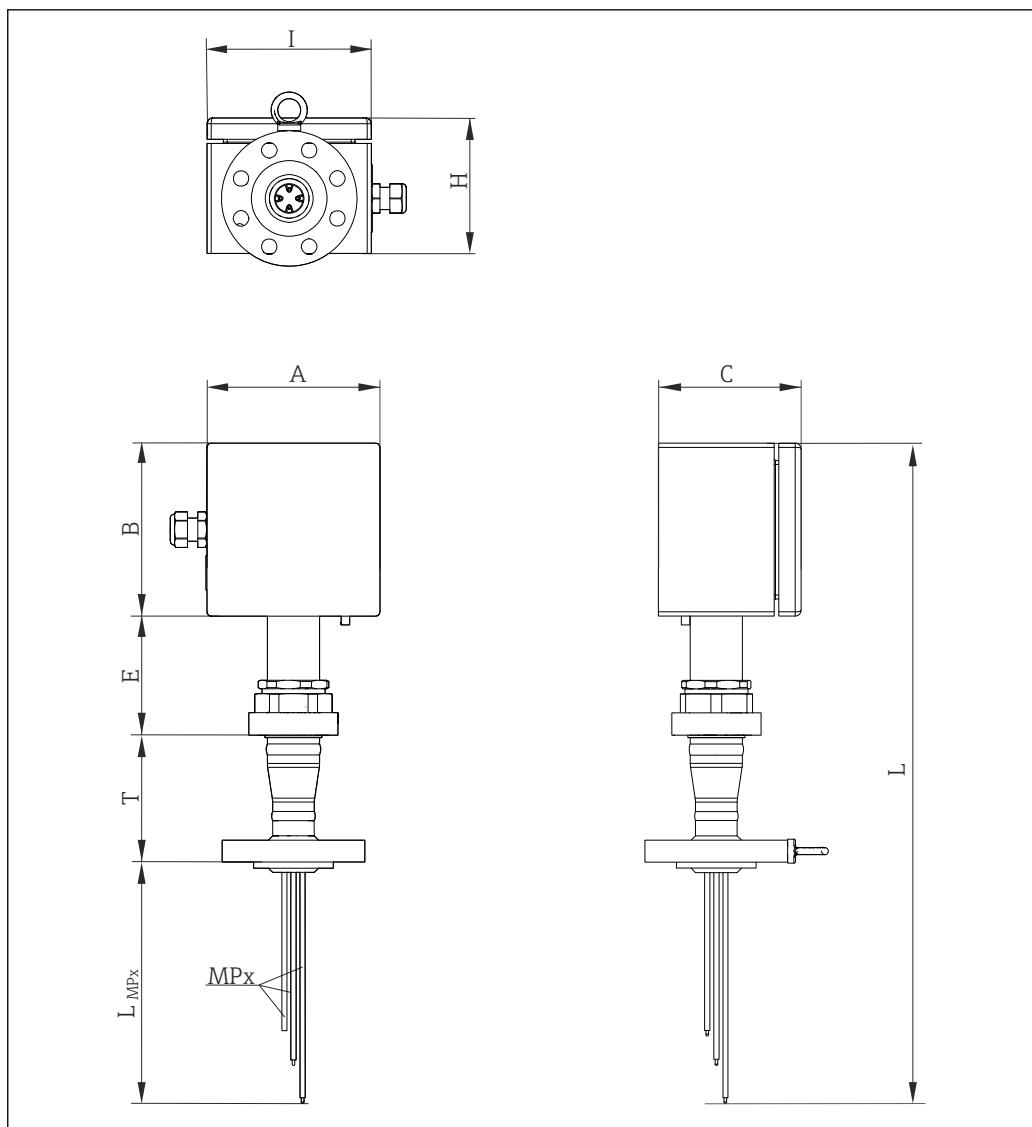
Design of the modular multipoint thermometer, with tube neck design. All dimensions in mm (in)
